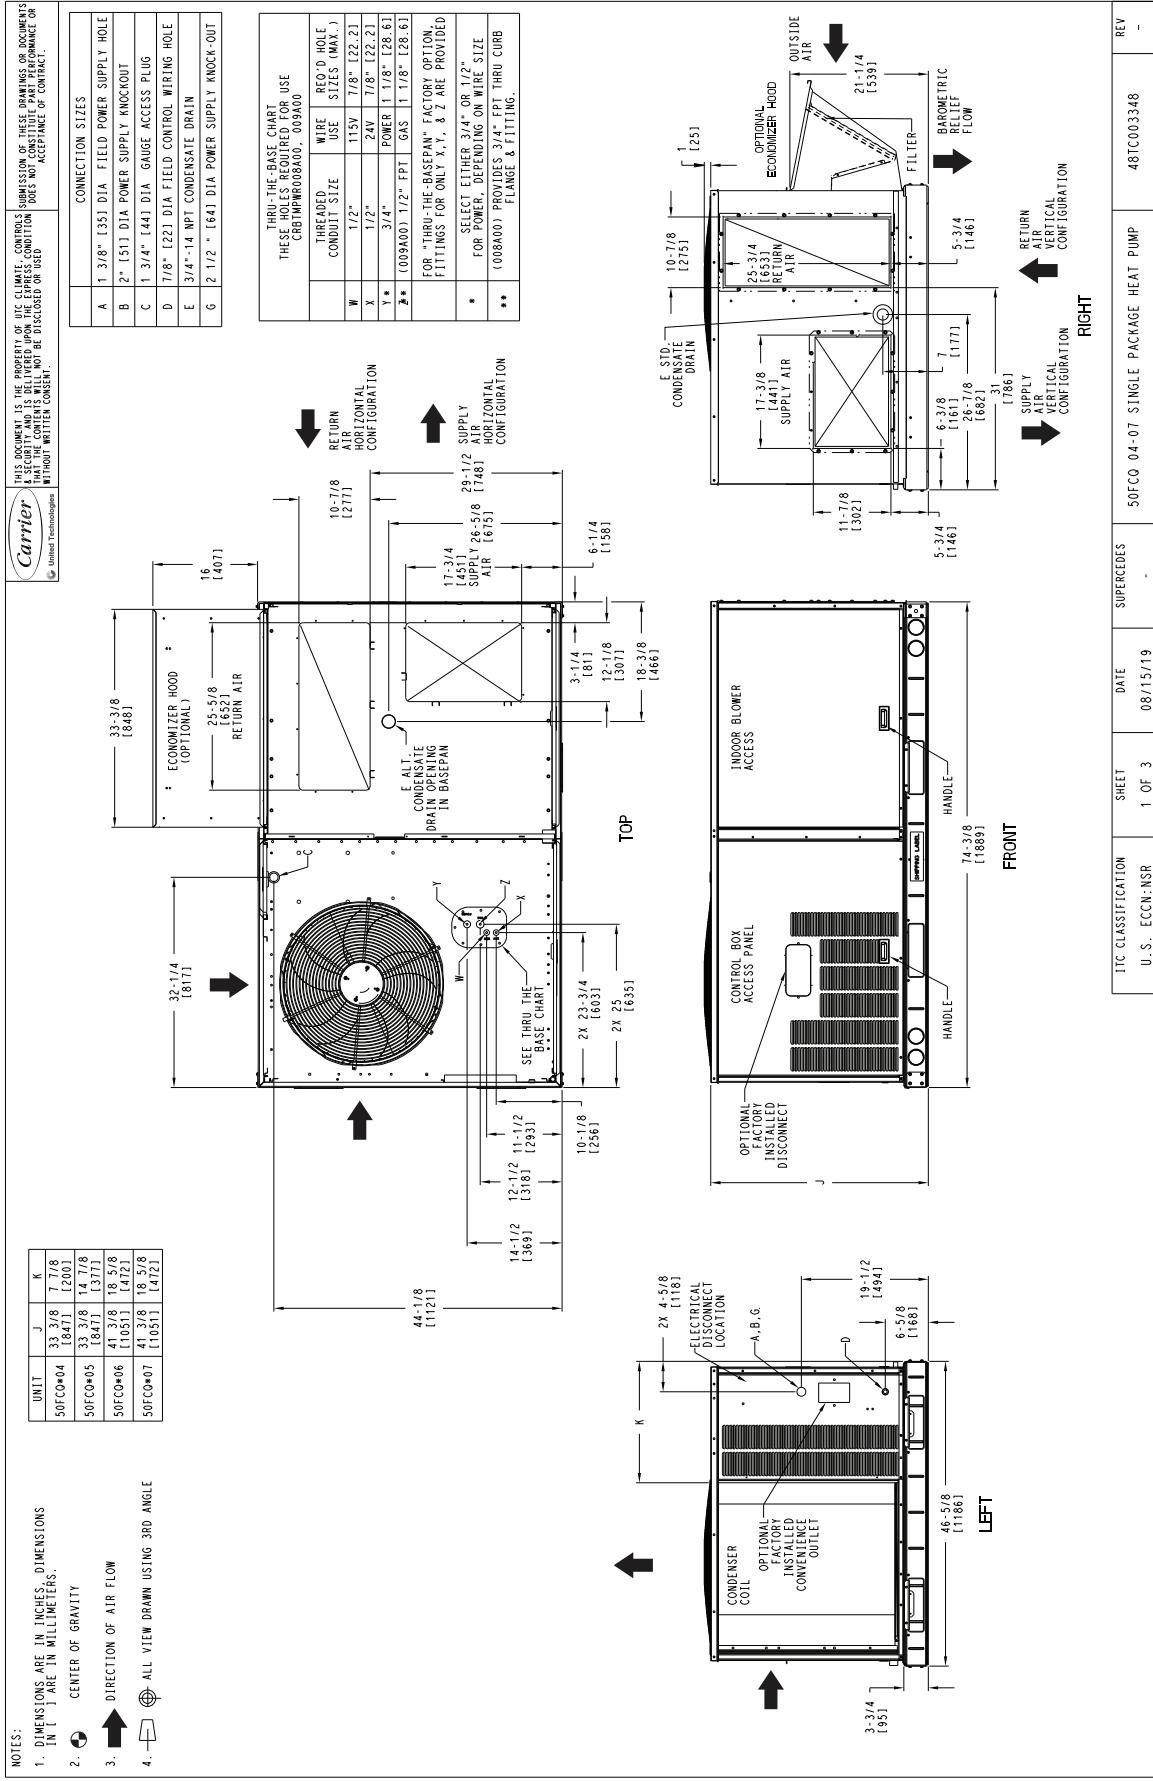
50FCQ*04-07 Dimensional Drawing
